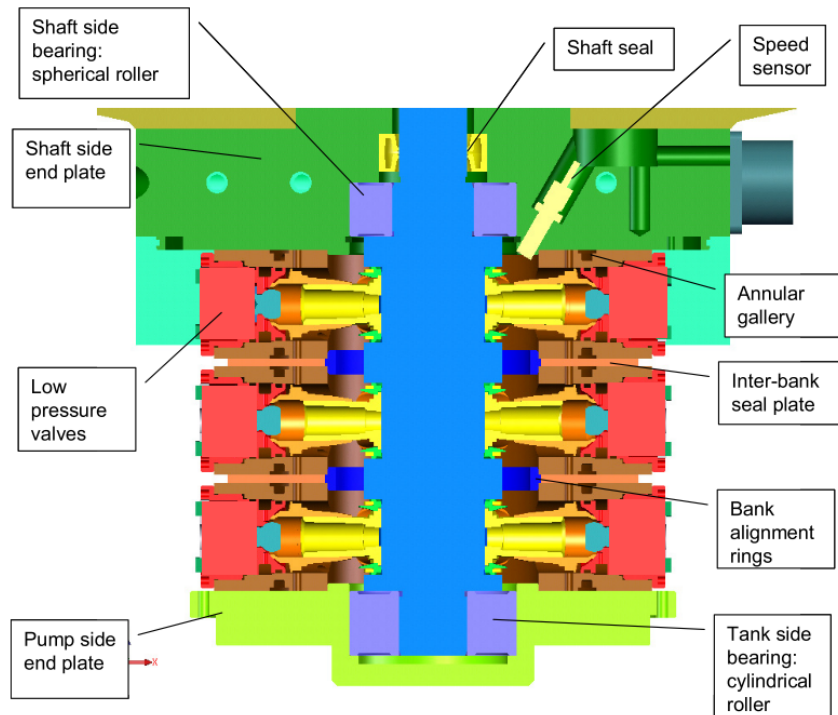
Plan section of a DDP showing arrangement of three banks of cylinders [13].
